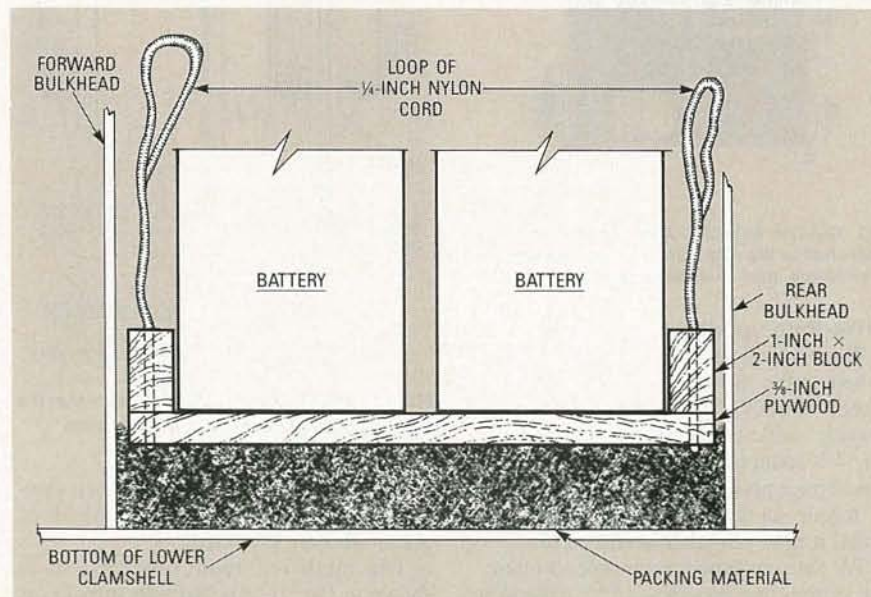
USING A BATTERY HOLDER will make installing and removing the batteries easier.
